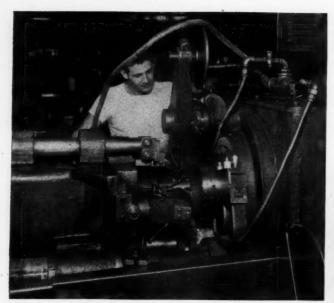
Above—Probably the largest automatic screw machine used today, this model handles 10½-in. stock
